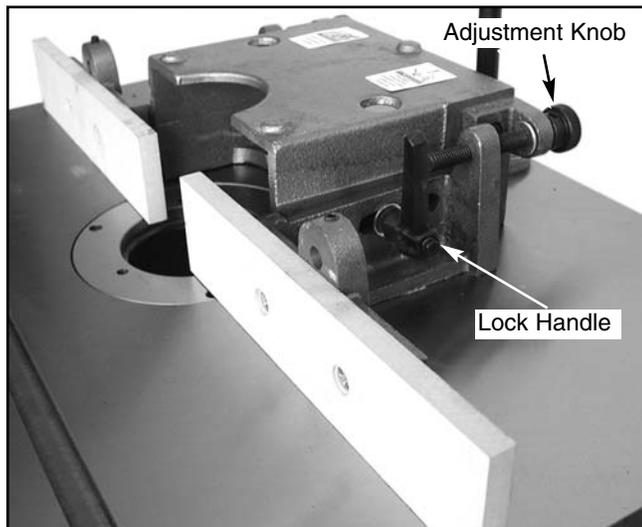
Location of fence locking handles. (Safety Guard removed for clarity.)
